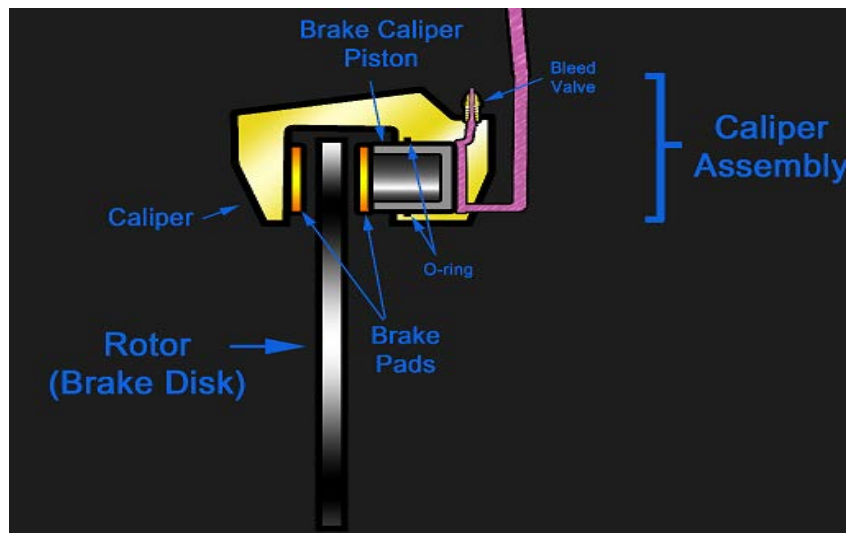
Brake Caliper assembly (Hydraulic Brake Diagram)
